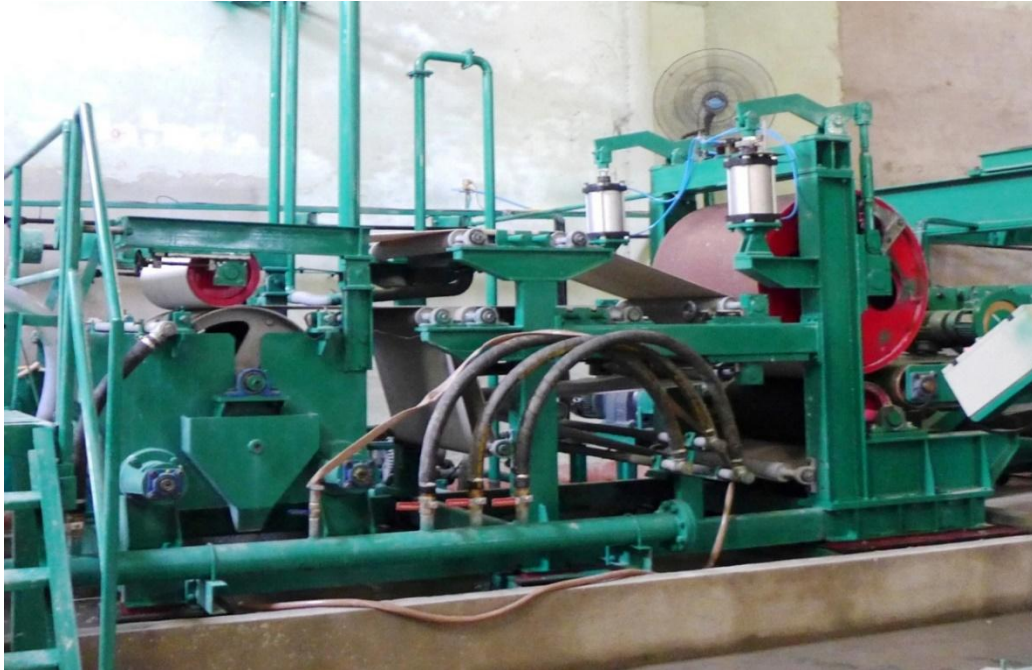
Mini-Hatschek machine for making flat PVA cement test samples
